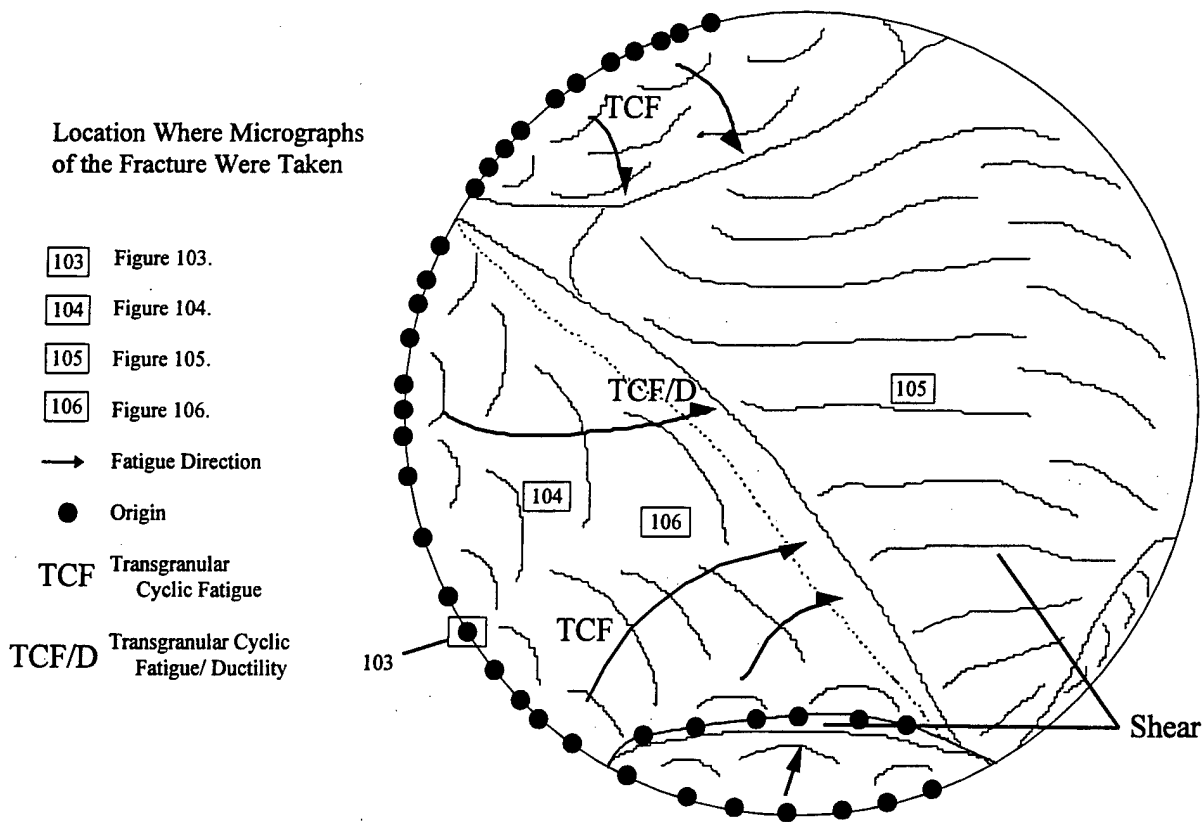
Schematic of the Fracture Surface of S&S Tie Rod -2.
